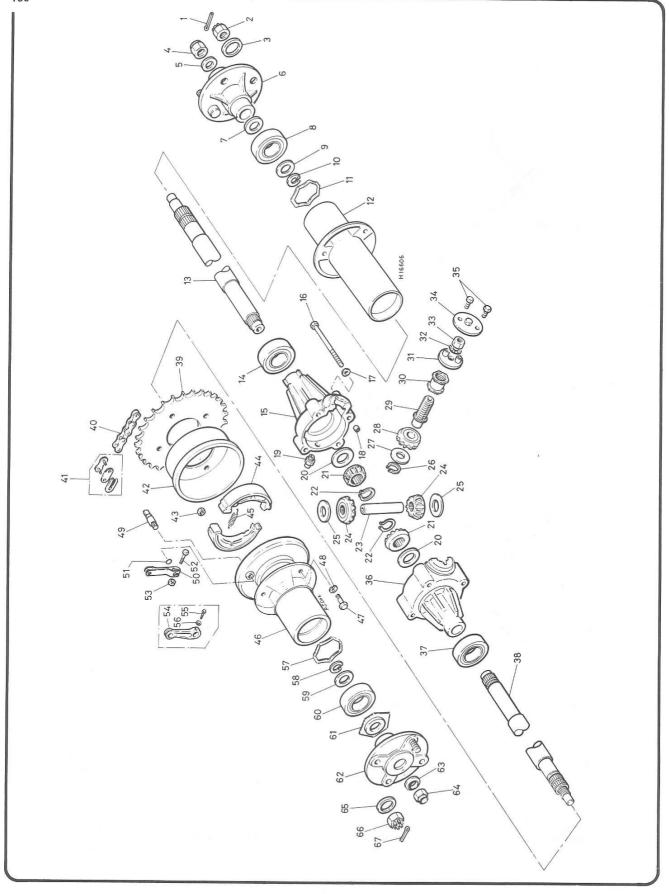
Final drive – KLT200 A (Sec 6)
